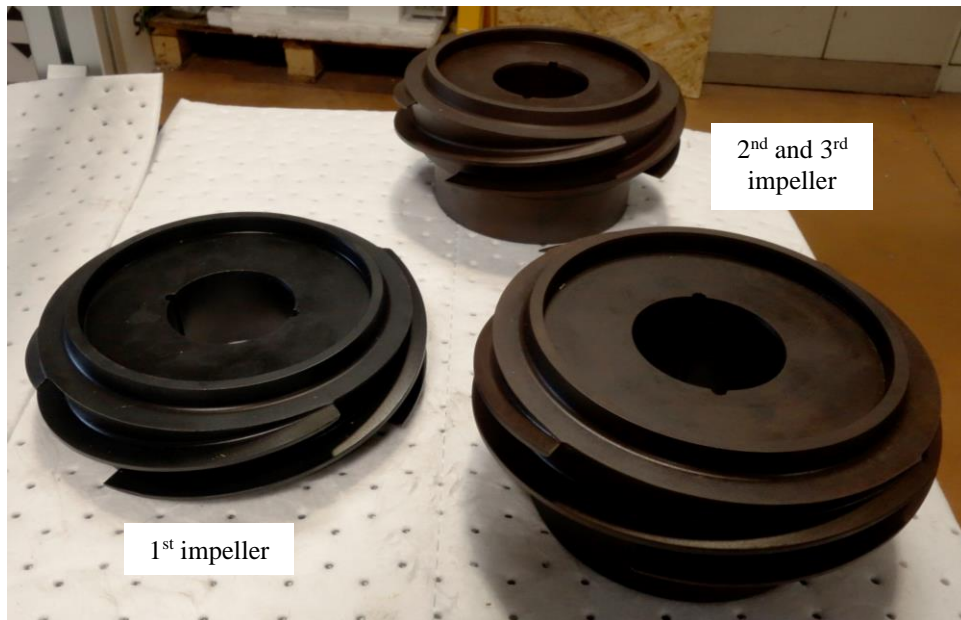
HAVR Helico-Axial Impellers. The Hydraulic Design is Identical in all Three Stages. The Second and Third Stage Impellers (Right-Hand Side) Have an Upstream Extension which is Located Behind the Hub of the Upstream Diffuser when Assembled. See Also Figure 7.
